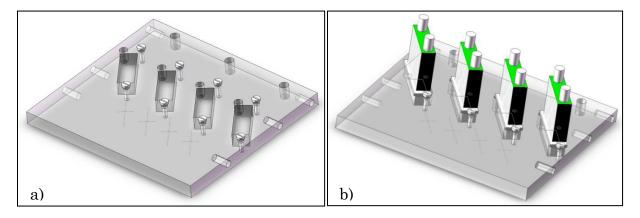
Single unit bottom plate (a. without printheads; b. with printheads)
